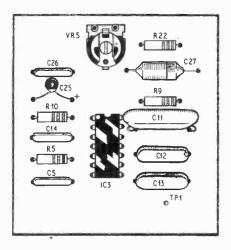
Component layout on p.c.b. for the stereo decoder
